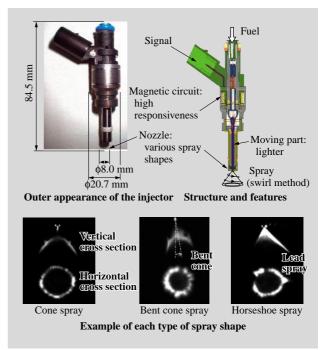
Appearance and Structure of Injector, with Spray Shape Examples.
